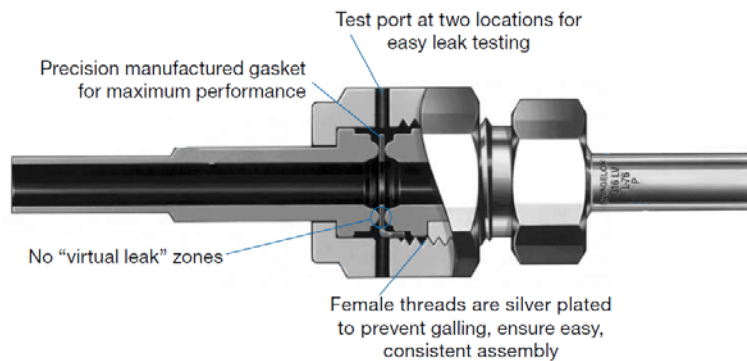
VCR assembly (by courtesy of Swagelok).
